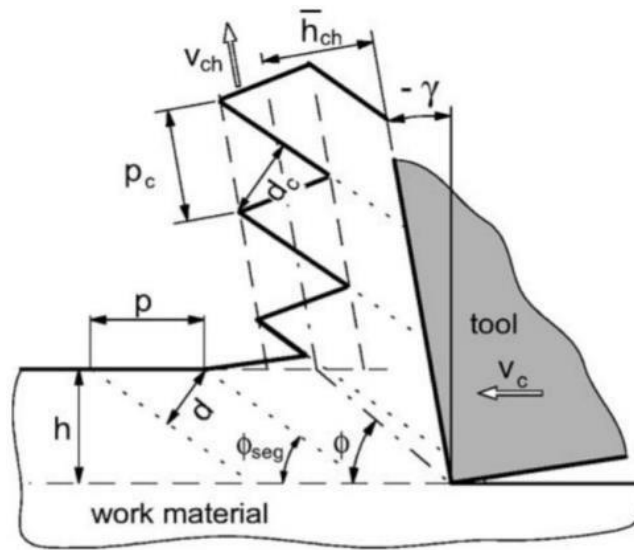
Segmented chip formed during machining of Ti-6Al-4V [33]
